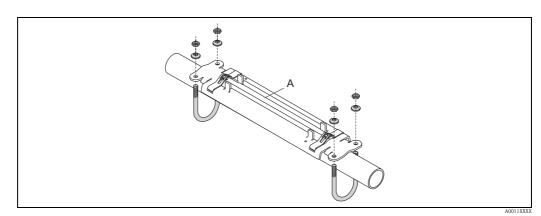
Mounting the Prosonic Flow P or W sensor holder (DN 15 to 65 / 1/2 to 21/2") with U-shaped screws
